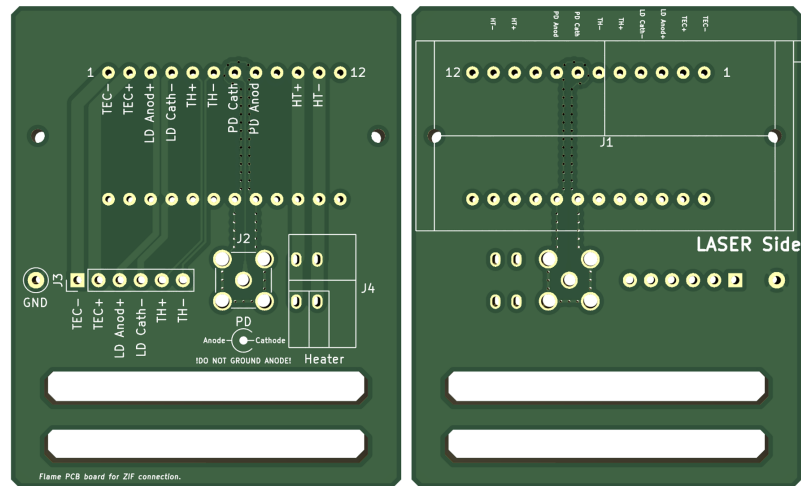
The fabricated printed circuit board for attachment to the module pins is shown here. The two slits on the bottom half of the boards are for feeding through the wires to alleviate stress on the pins.
